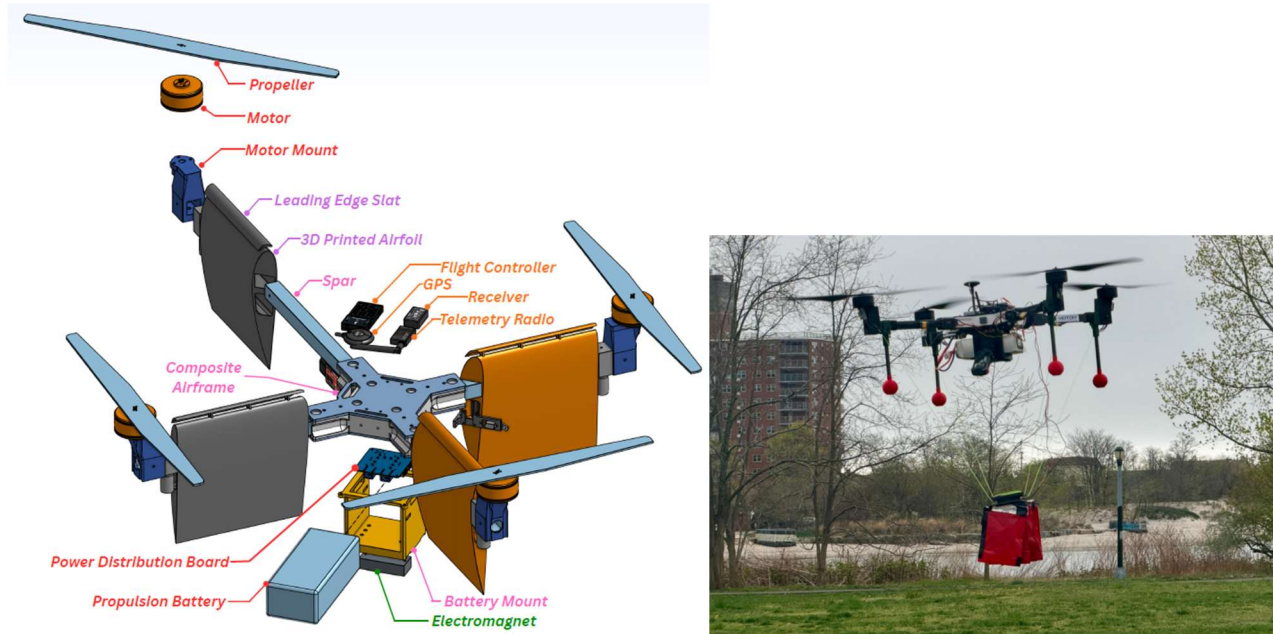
VFS VTOL aircraft (credit: 2025-2026 VTOL Team). (Left) Exploded view of most major components, showing three assembled spar-wing-motor-propellor assemblies and one in exploded view, along with the central composite airframe body. (Right) VTOL flying with payload and legs (not shown in left figure) and with airfoils removed.
